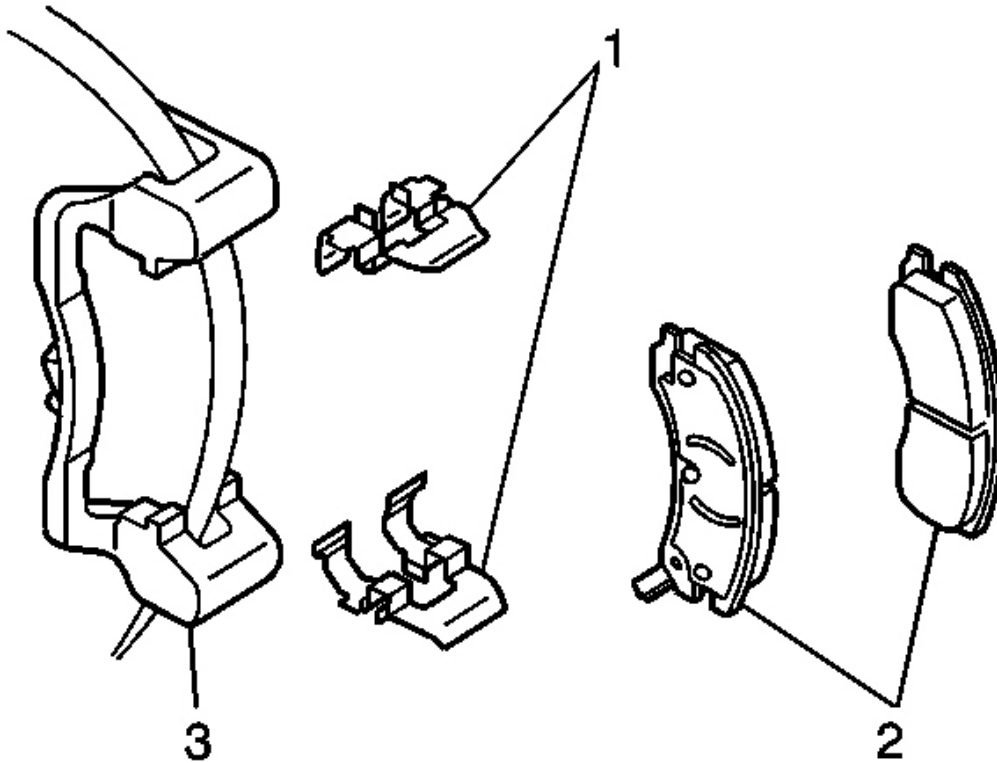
Brake Pads, Brake Pad Retainers, & Caliper Bracket
